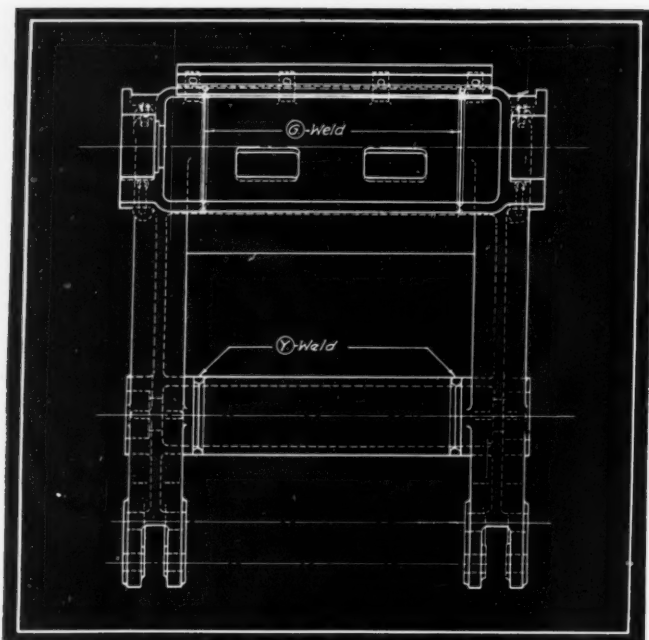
Side arms of double rocker arm are made of steel castings, tubular cross member is seamless steel tubing, semi-tubular members of pressed plate is welded to the side arms. The part is stress relieved
